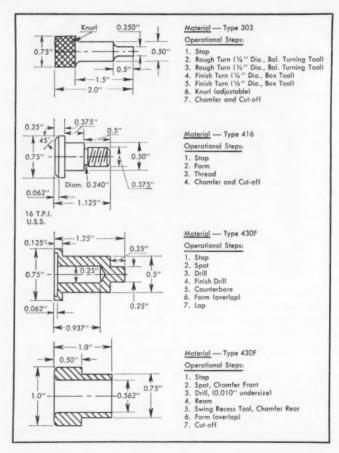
Typical operational sequences for producing various workpieces from different types of stainless steel on Brown & Sharpe automatic screw machine.
